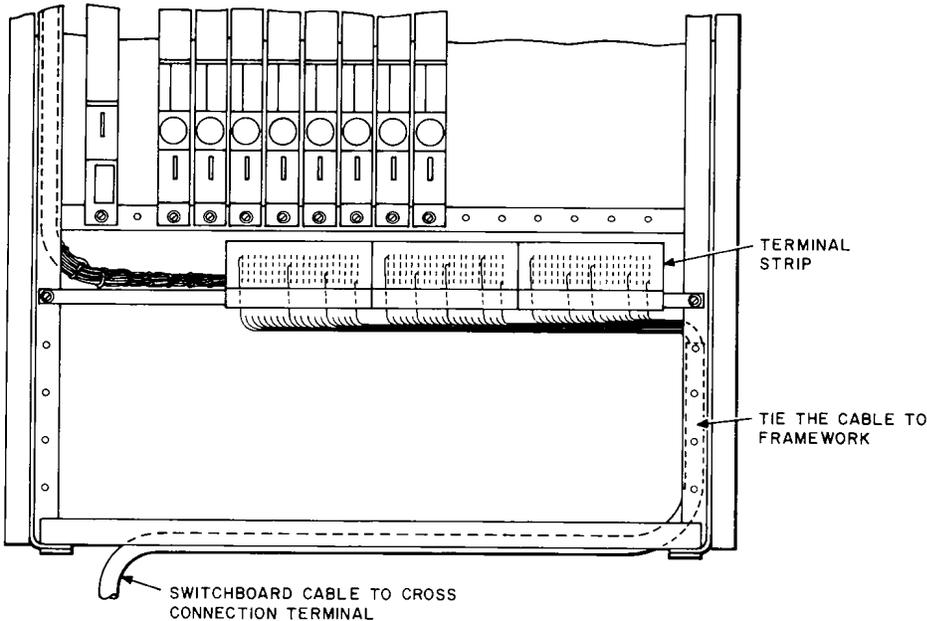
Arrangement for Terminating Switchboard Cable when Cross-Connecting Terminal is Provided—Rear View
